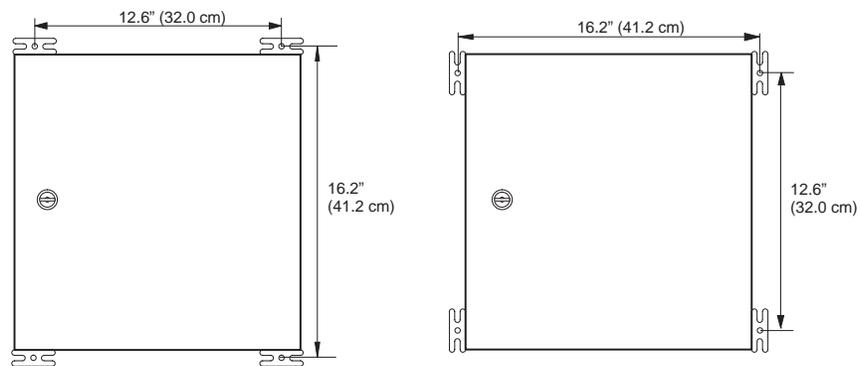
Small NEMA 4 Housing - Installation Dimensions
